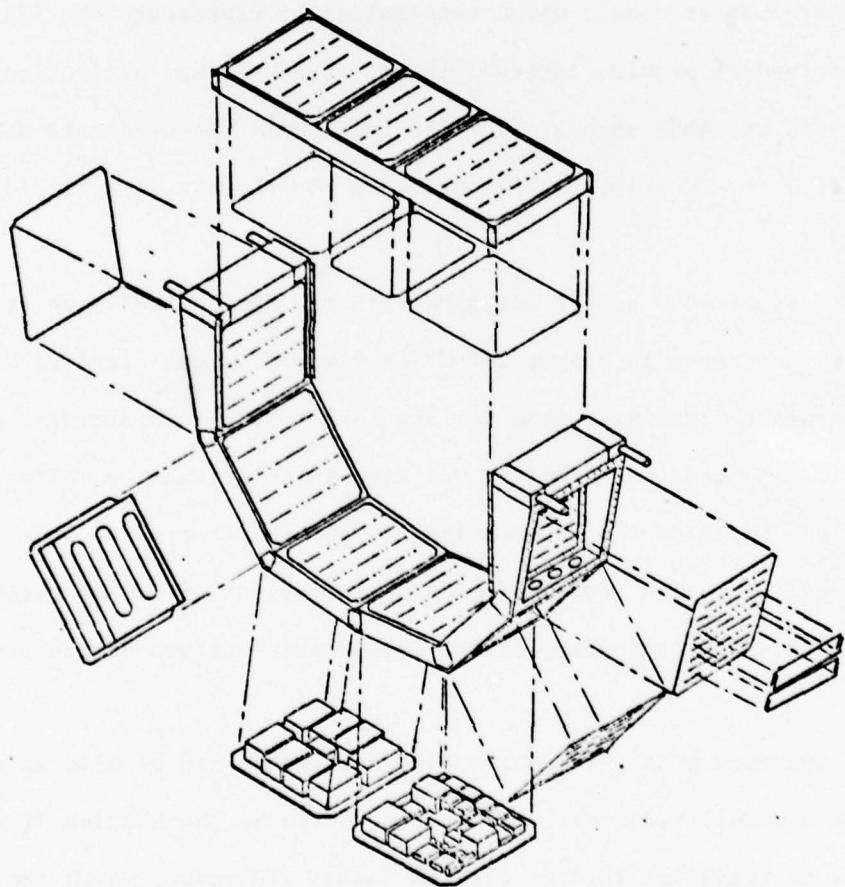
EXPLODED VIEW OF STANDARD TEST RACK
